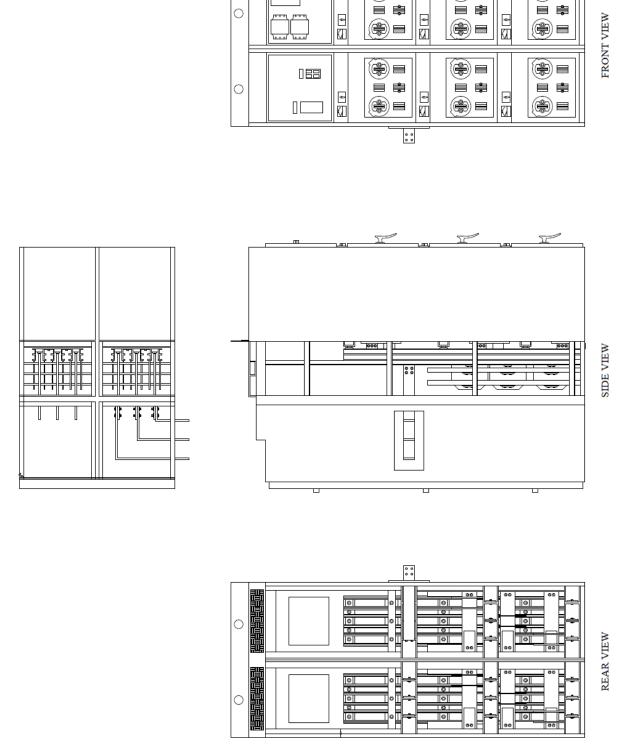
Drawing of interior layout of LV metal enclosed indoor switchgear.
